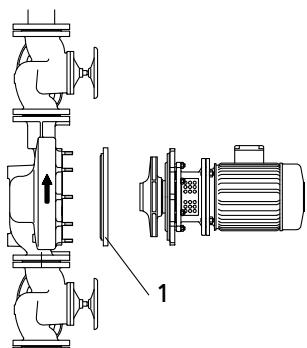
Horizontal installation with blind flange (1 = blind flange, accessories)
